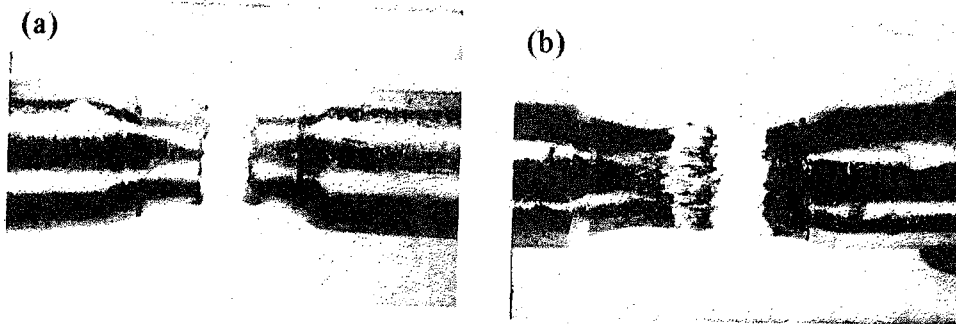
Macroscopic views of the fatigue fractured specimens (the right side of photographs shows the fixed end).
